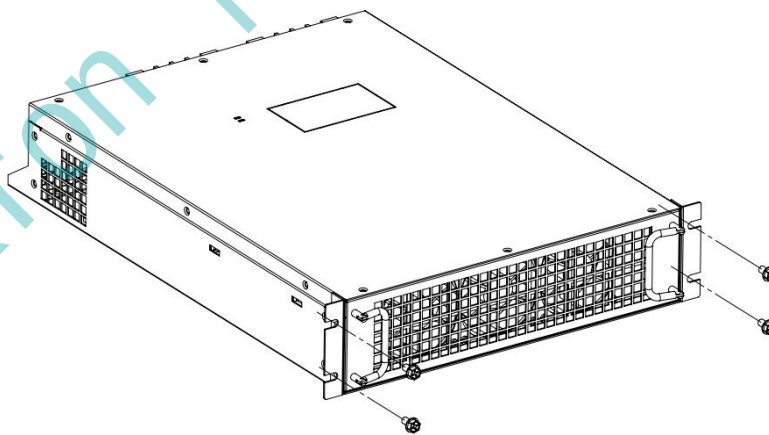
Mounting Hole Diagram for Rack-Mounted ASVG-LN
